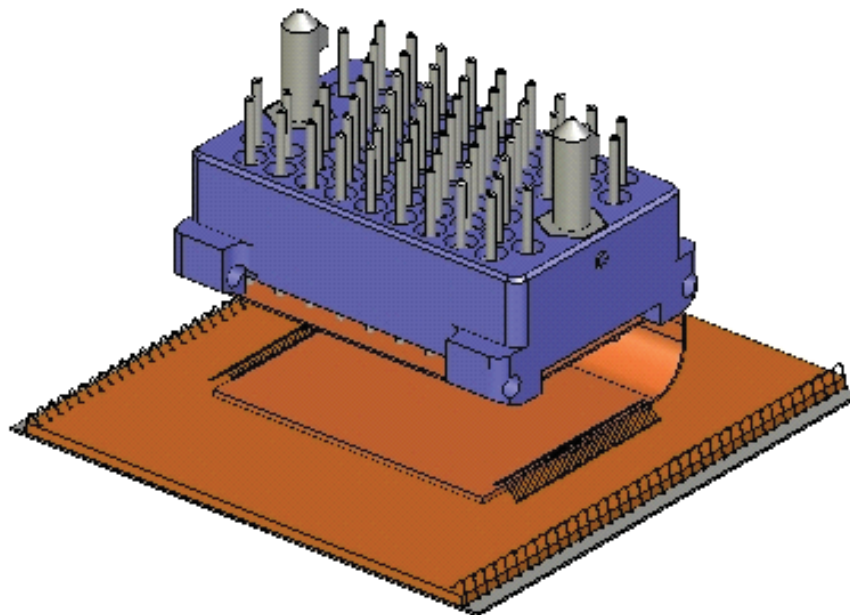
View of the package without the pedestal showing the location of the wire bonds.
